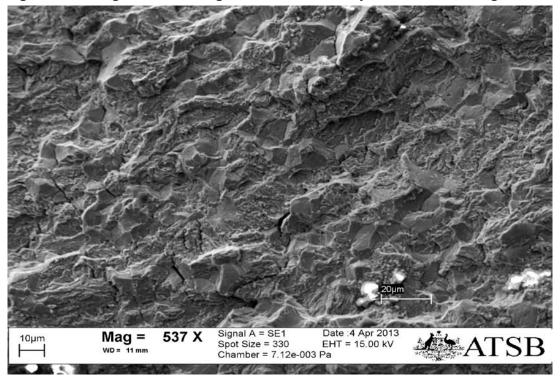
Intergranular cracking below the threads adjacent to the nut flanged surface.
